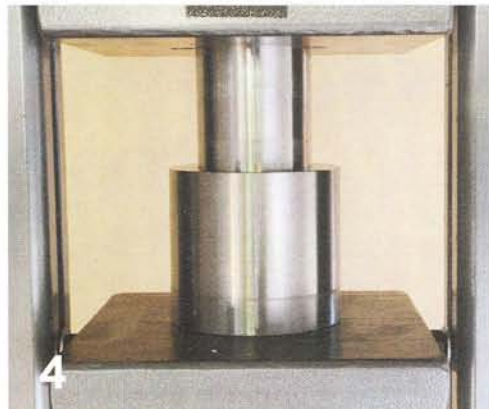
Once the metal is preformed, assemble the system again: the die, the preformed copper (annealed and lubricated), the domed 95 durometer urethane with the domed side facing the metal, and finally the pusher. Center the assembled cylinder. To press in the detail, press to 8,000 psi.
